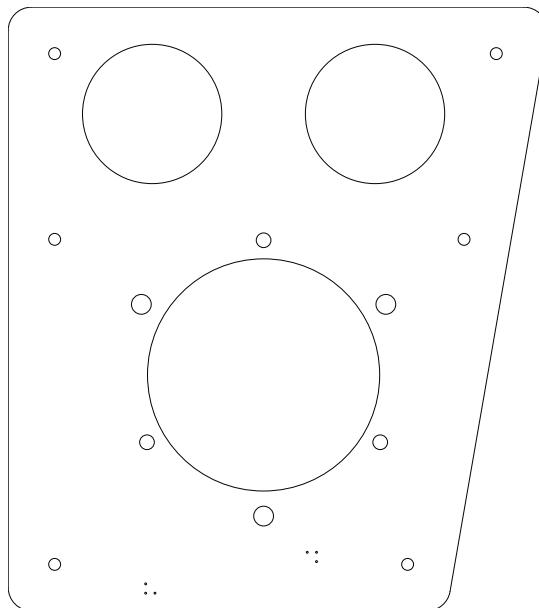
RV-7/9 GMU 22 Mounting Bracket (115-01027-00)
